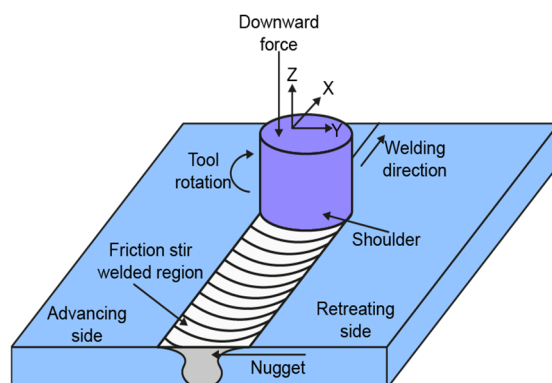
Schematic representation of the friction stir welding (FSW) process, with the rotational tool, shoulder contacting, pin, forward side (AS) and backward side (RS). Copied from Tolun, 2022, ref. [22] as cited herein.
